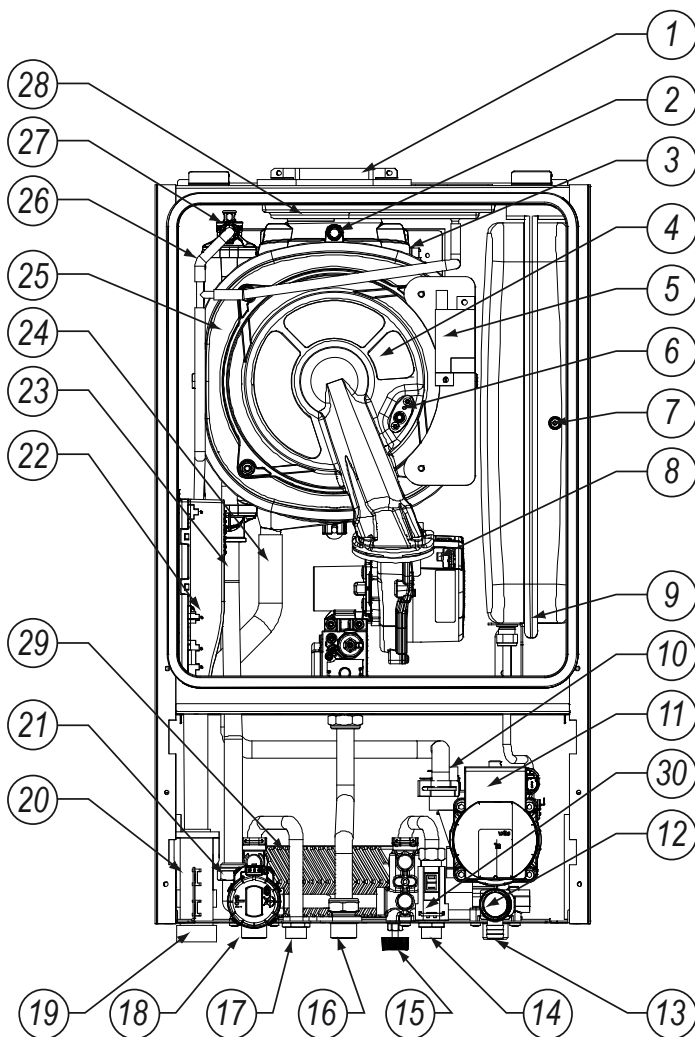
Internal design of the heat-only gas boiler DEFRO DCG COMFORT 25 1F.
